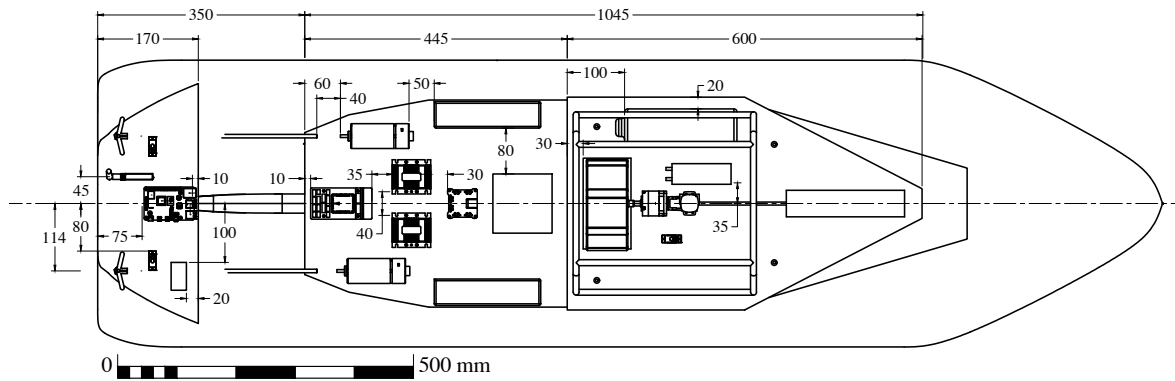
Arrangement of components in a two-dimensional layout, with dimensions specified in millimeters.
